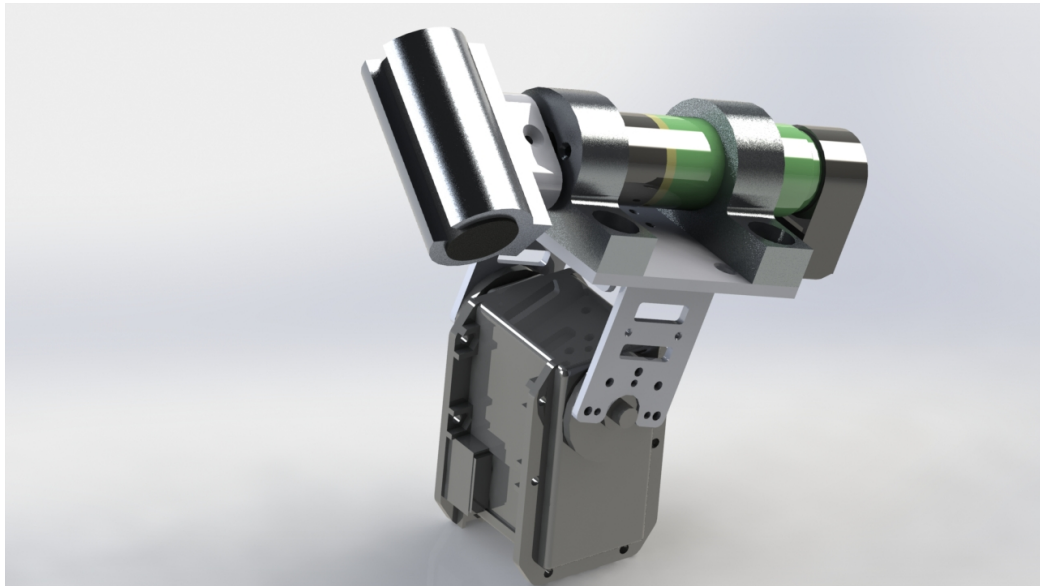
A render of the design of the aluminum holders that fix the DC motor to the servomotor
